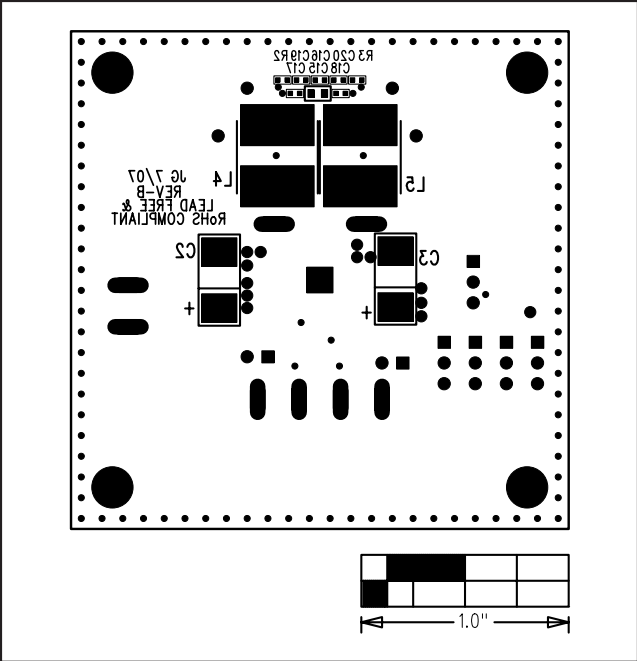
MAX9713 EV Kit Component Placement Guide—Solder Side
